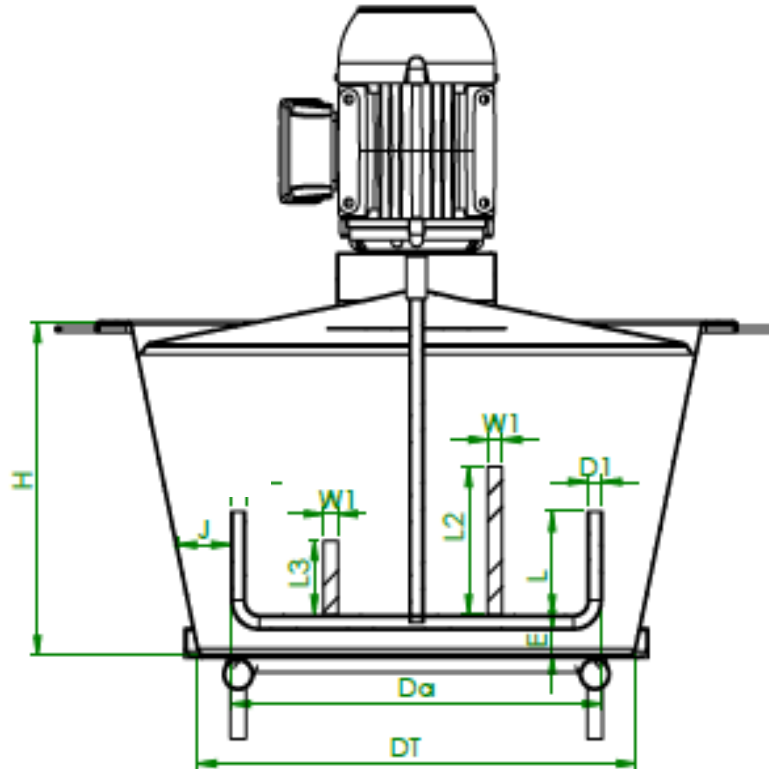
Technical drawing of the synthesis mixer dimensions; DT: diameter, H: height of the tank, Da: diameter of impeller, E: distance from the base to the impeller, J: width from tank to impeller, L1 to L3: length of impellers, D1: diameter of the impeller and W1: width of the impeller.
